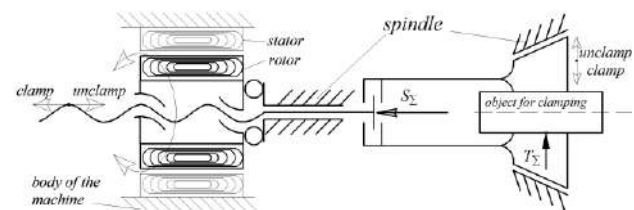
The scheme of the design of the clamping mechanism with screw gear
